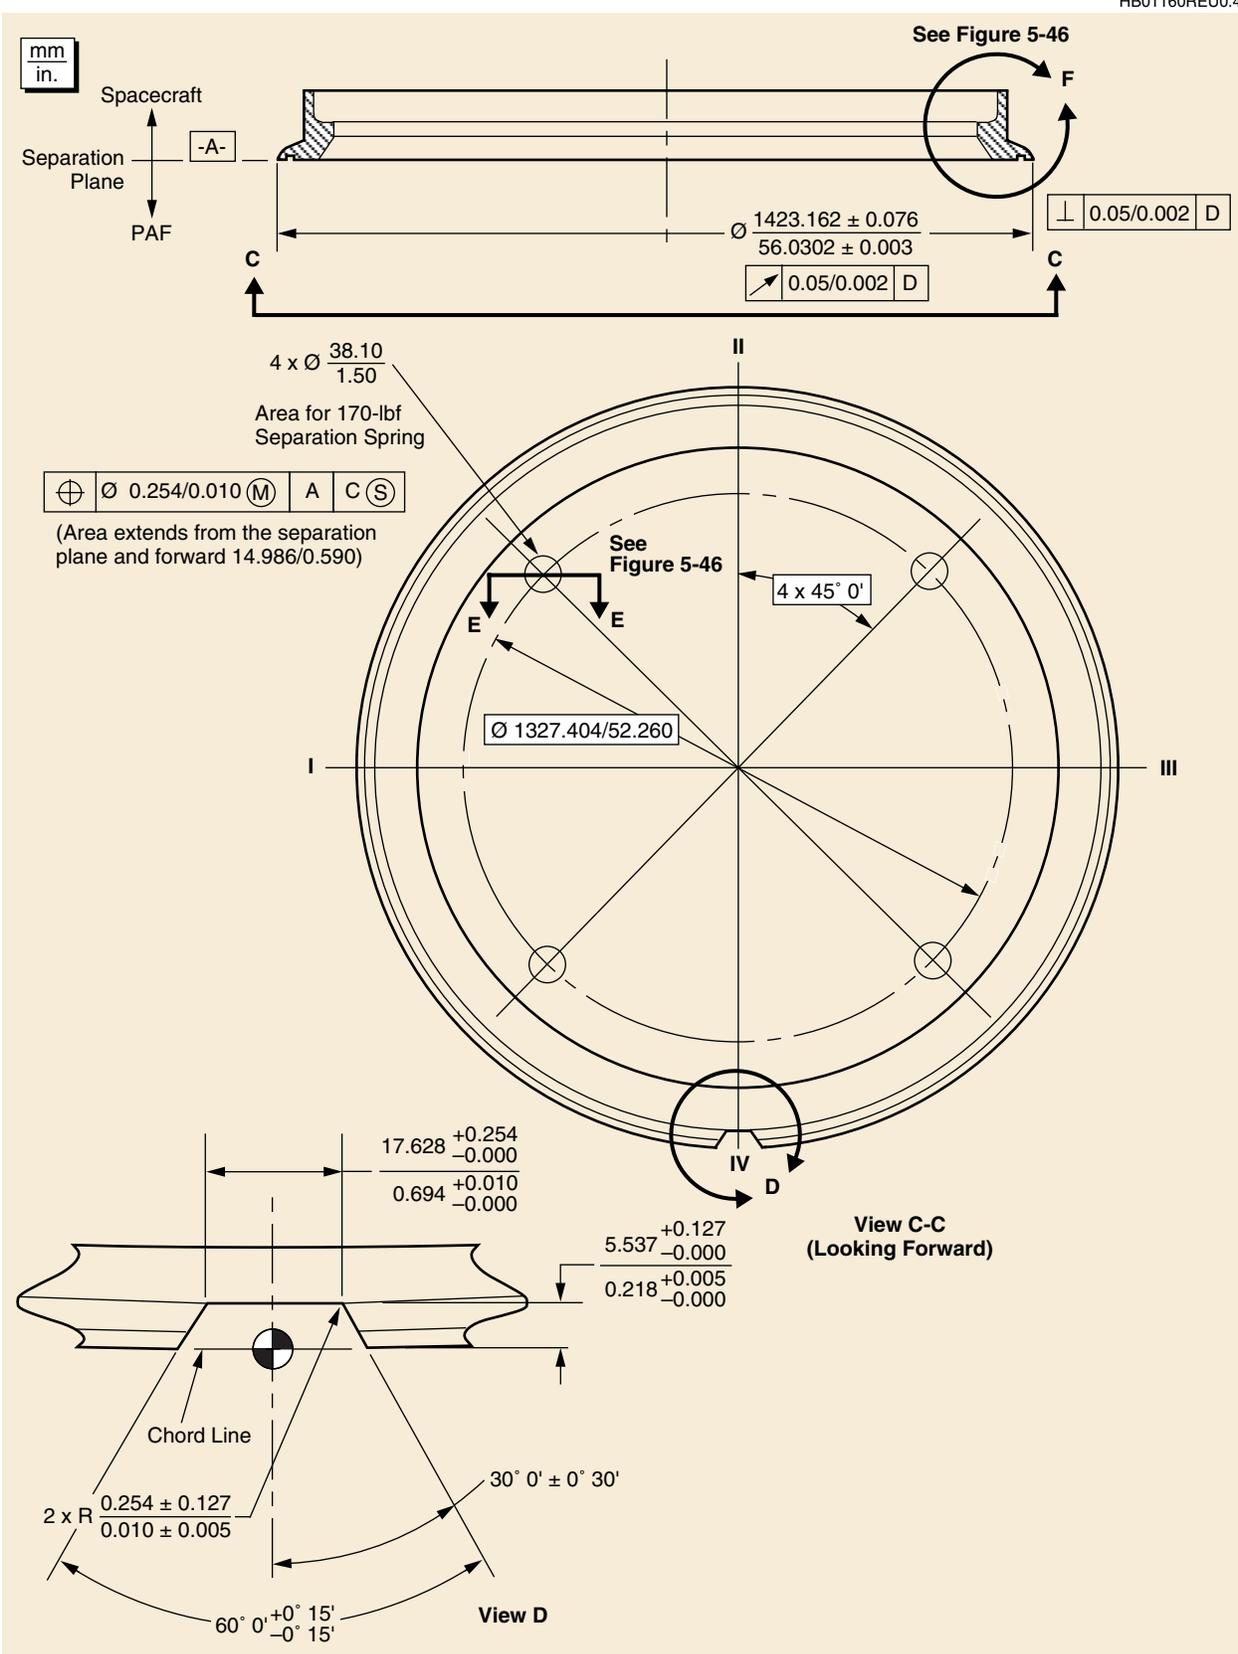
Dimensional Constraints on Spacecraft Interface to 5624 PAF
